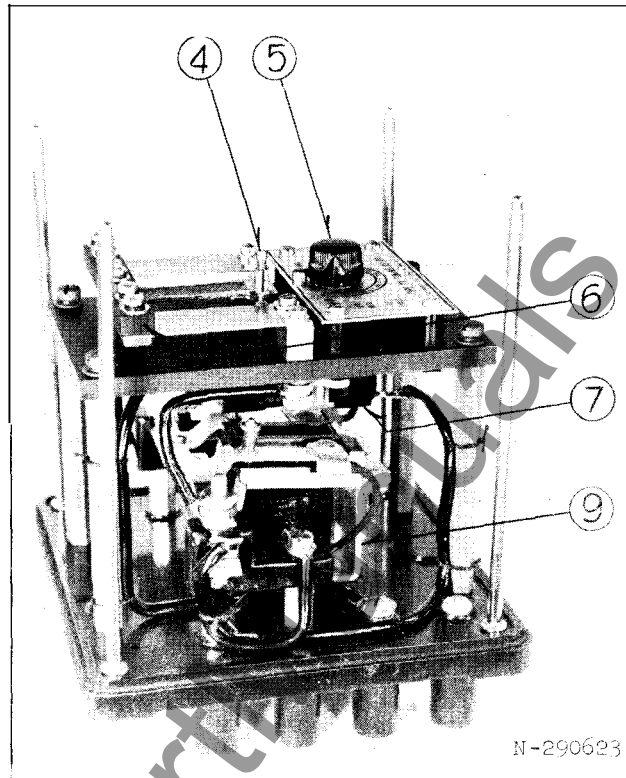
Side View of the Type TH Single-Element Thermal Timing Relay. 4—"F" Bimetal Screw, 5—"T" Timing Screw, 6—Bimetal Assembly, 7—Micro Switch, 9—Auxiliary Contactor.
